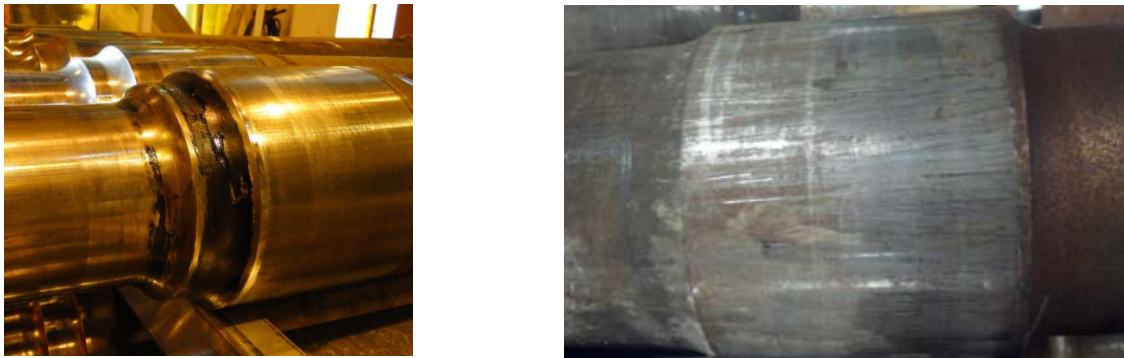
Axle Wheel Seats with some scoring from Wheel Removal
